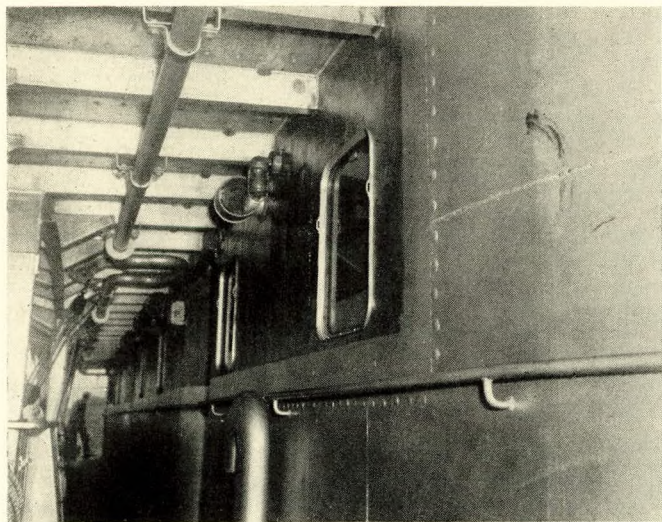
Connexion of house to deck. The house sides are connected to a coaming 3ft. 6in. above the deck
